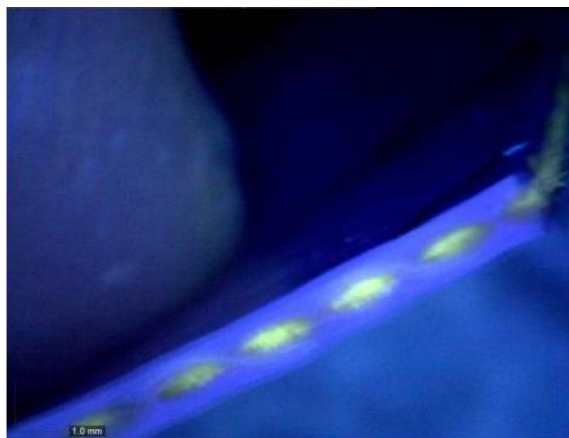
Cross-sectional cut of 0.013 pin hole – dye penetration reduces the further from the hole
